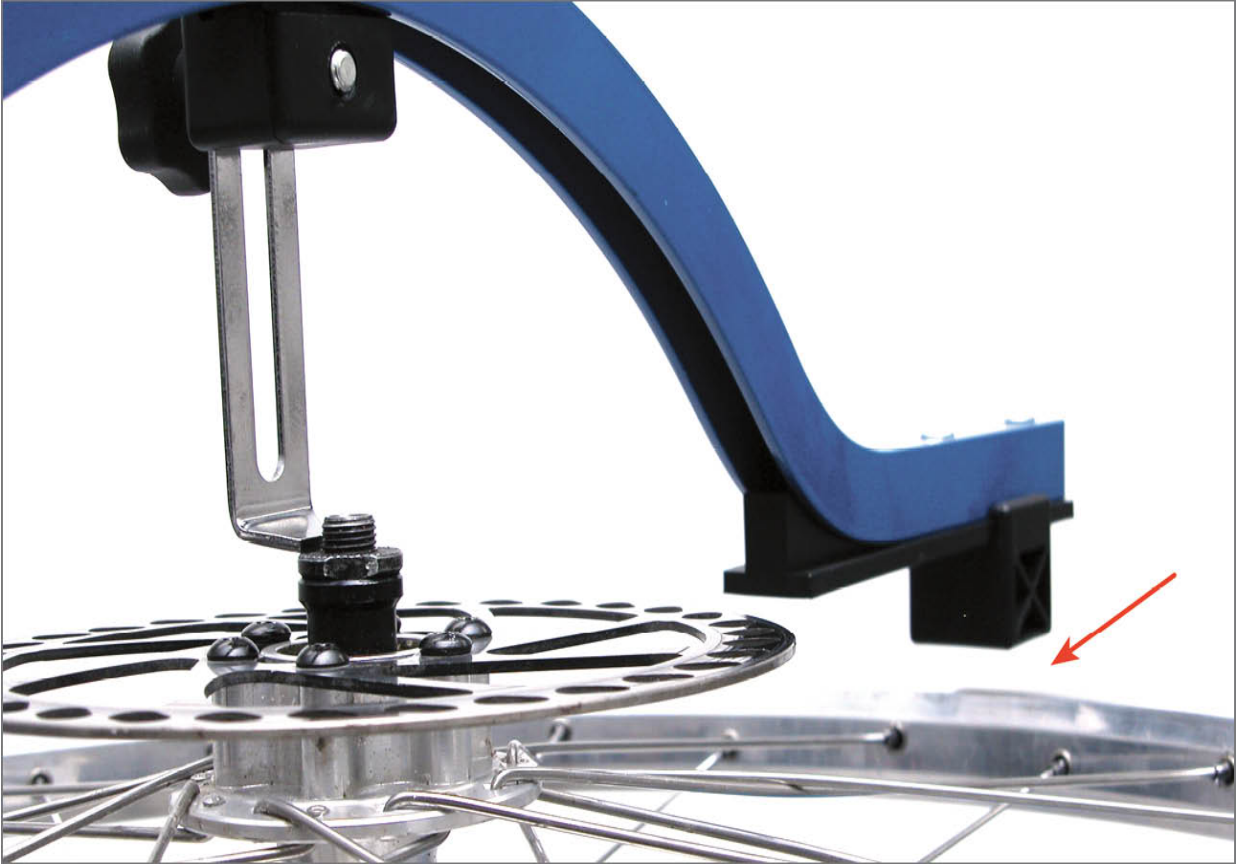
Gauge indicator showing rim centering error relative to rim contact
